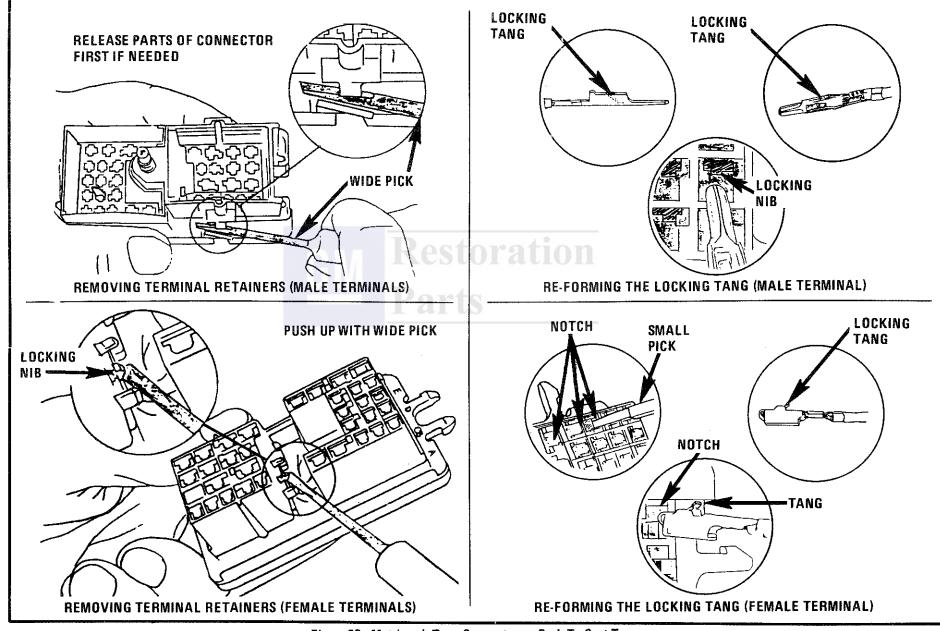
· Metri-pack Type Connectors — Push-To-Seat Type
